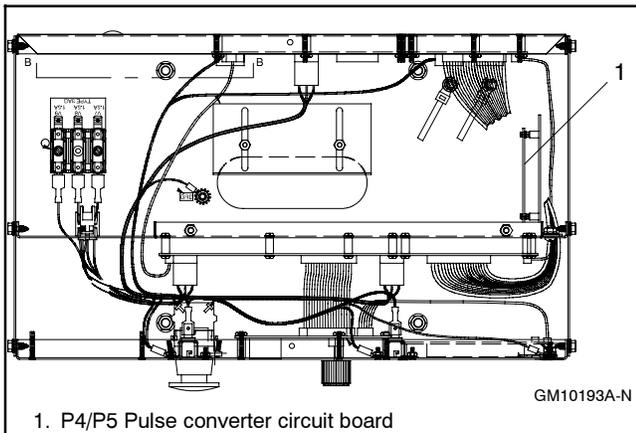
Pulse Converter Circuit Board Mounting in 550 Controller (top view)
